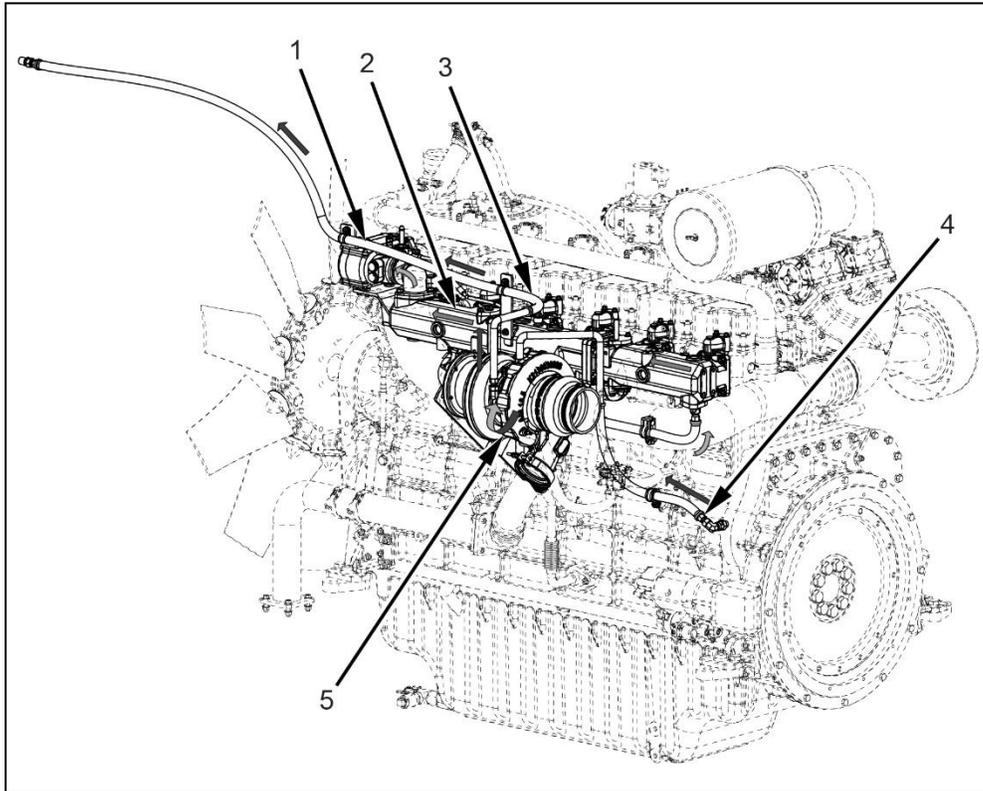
Overall layout of Cooling Circuit (Left Side)
